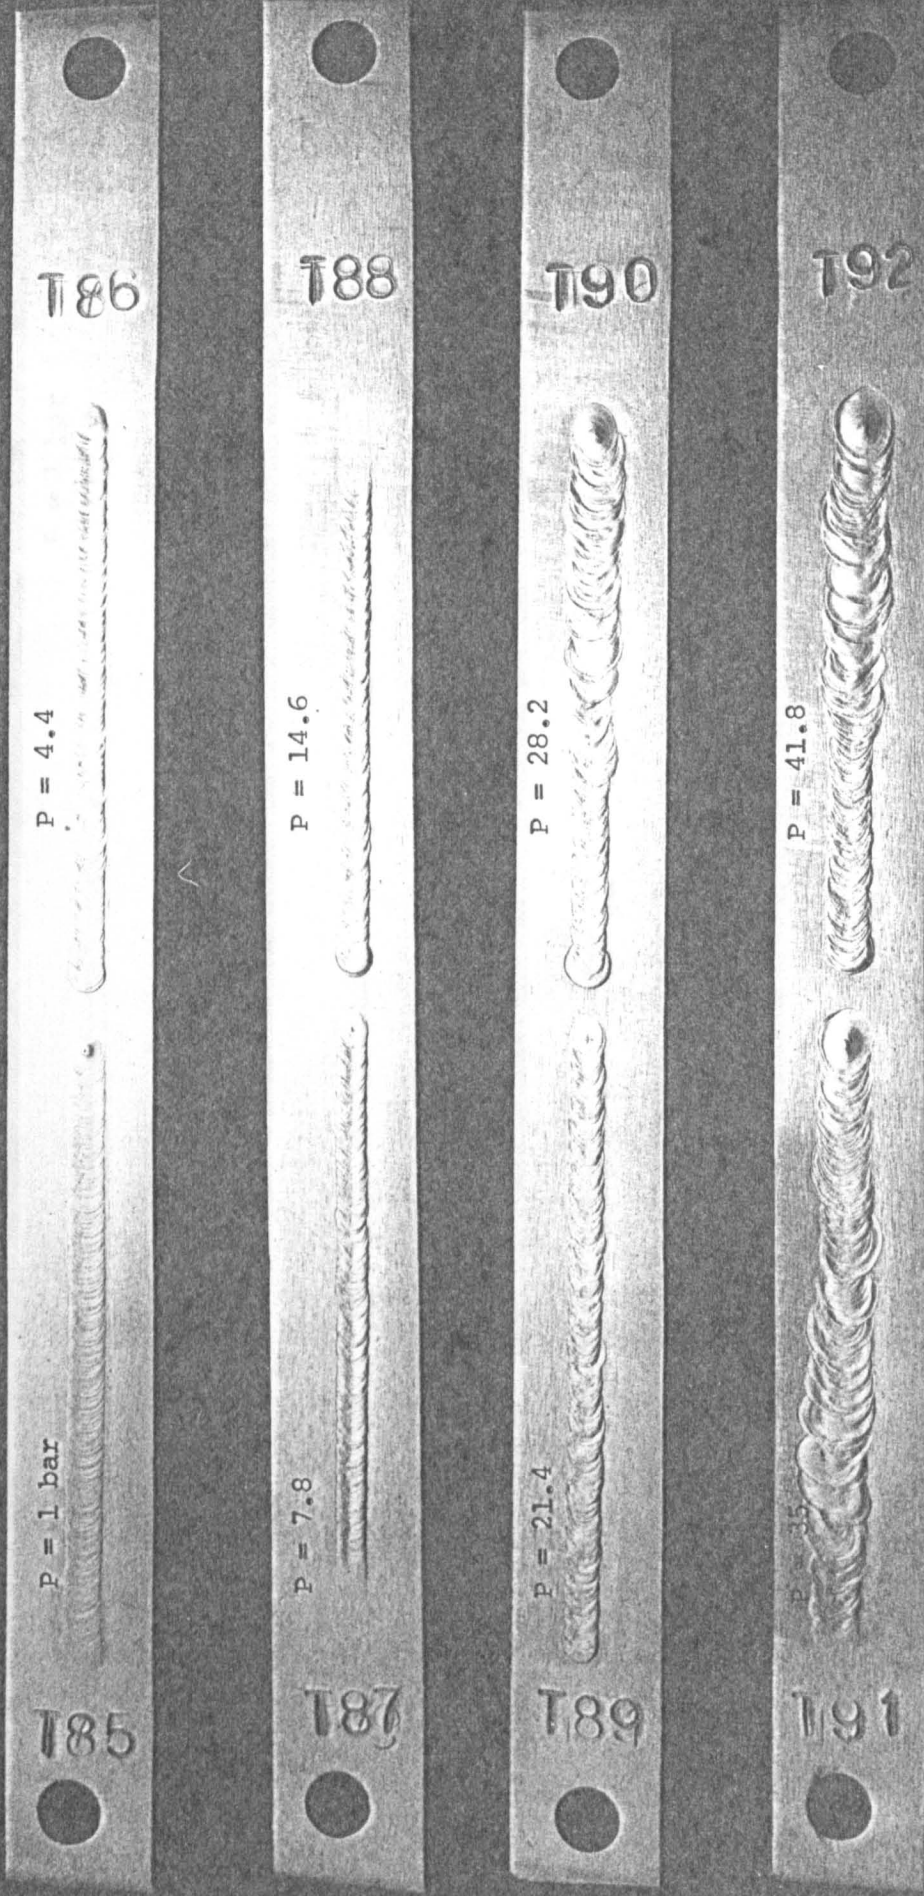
Stability of Argon TIG Weld Beads. (150A, 2mm arc with no shield on mild steel, welding speed of 1.4mm/s)
